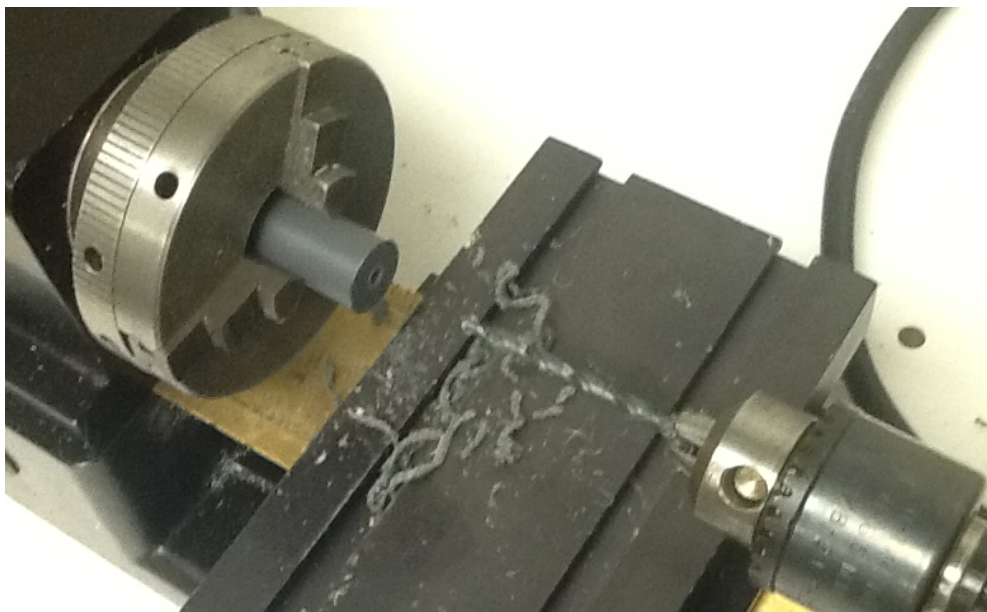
3: Fabrication of plug step 3. A 1/8" drill bit was center drilled through the entire piece for the sensor wires.
